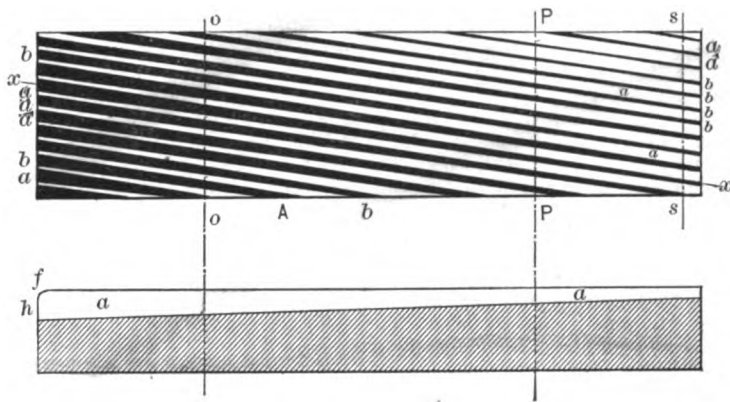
Plan and Section of One Die for Rolling Threads.
